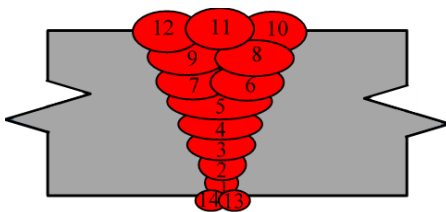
Schematic illustration of 14 - consecutive TIG Welding passes
